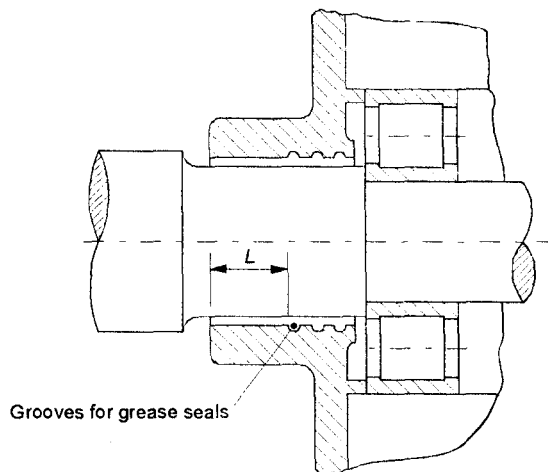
Example of cylindrical joint for shaft of rotating electrical machine
